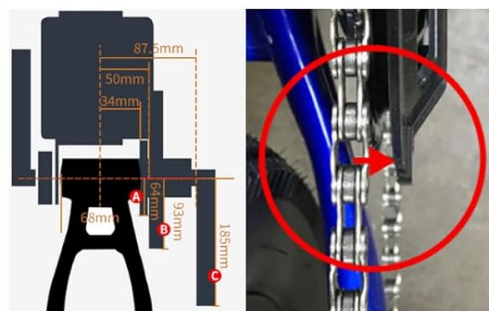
Visual guide for checking bike compatibility, including bottom bracket dimensions and chainstay clearance. It is important to measure your bike's bottom bracket inner diameter (between 33.5-36mm) and length (68-73mm). Ensure the sprocket will not interfere with your bike's chainstay.
